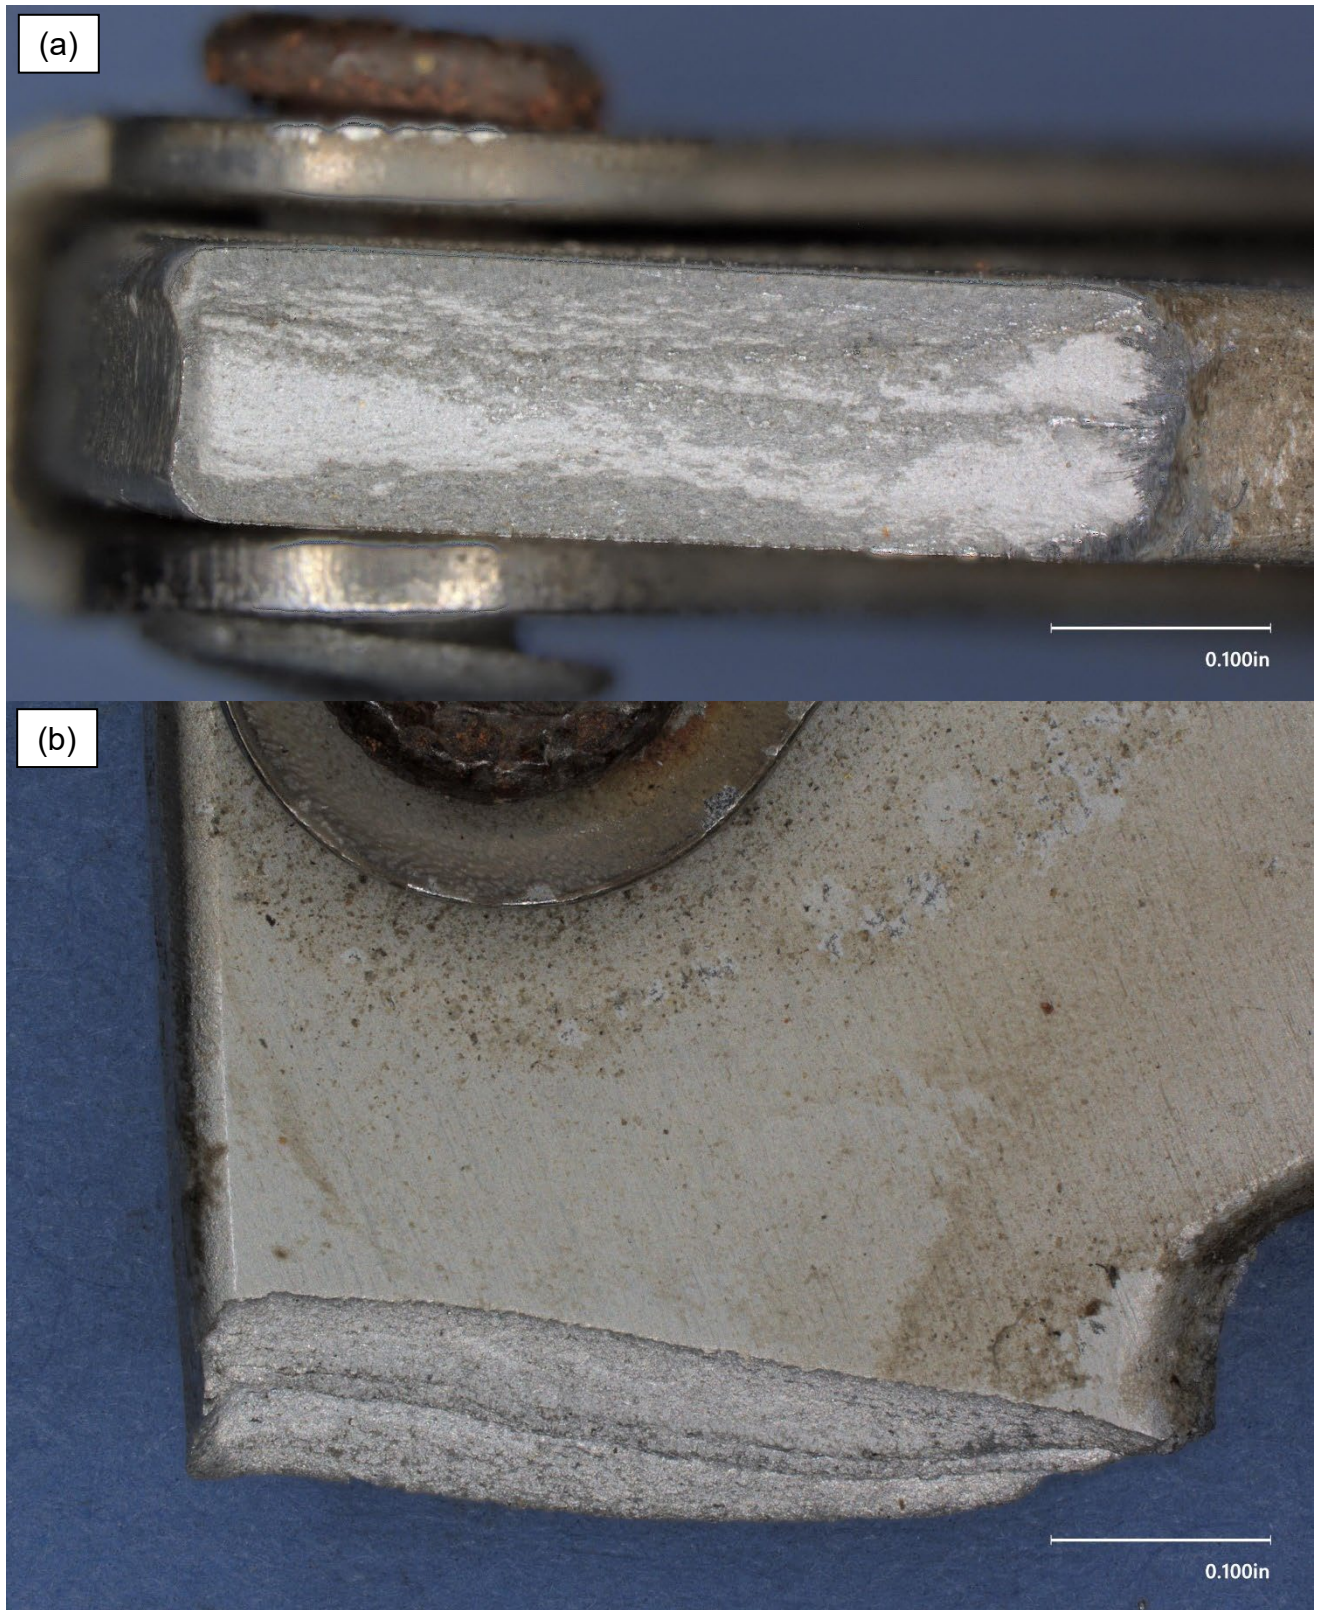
View of the A clip fracture surface on the riveted arm from (a) the surface and (b) the side, as received.
